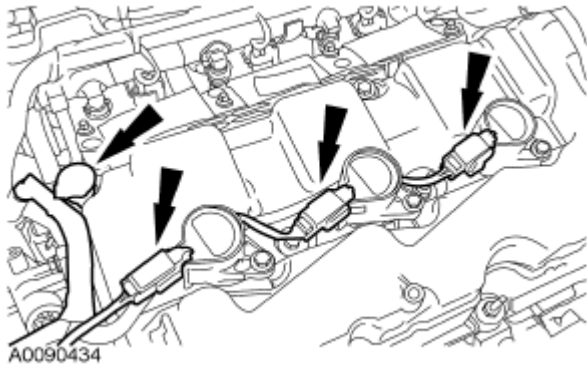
Locating Coil-On-Plug Electrical Connectors & Wiring Retainers
